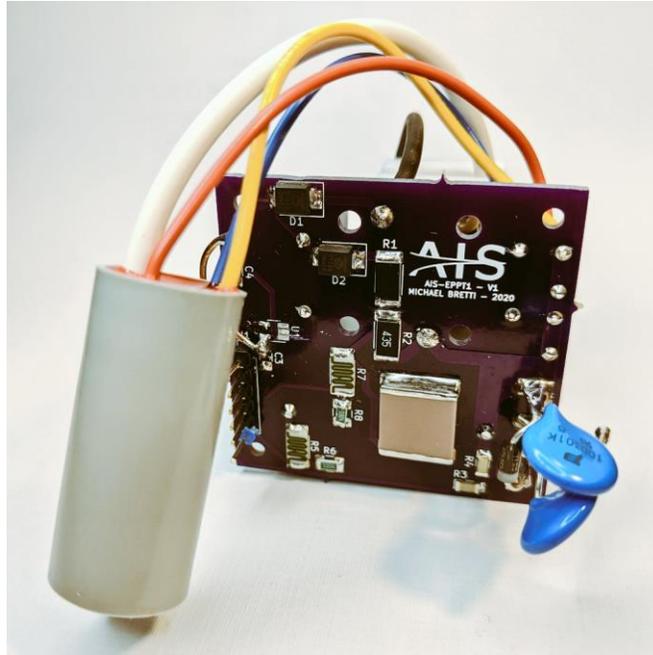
Back view of the gPPT3/EPPT1 modified prototype assembly for ignition test 3
